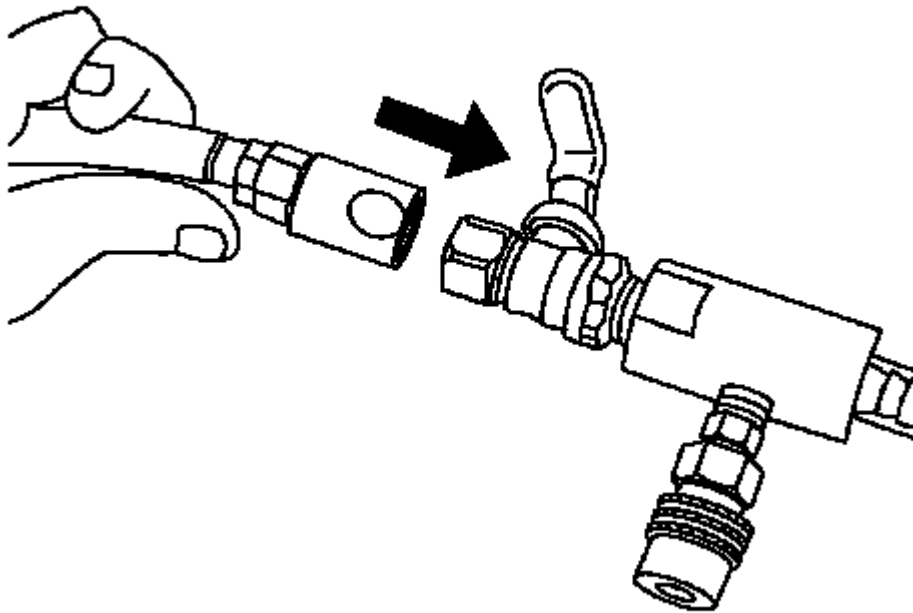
View Of Shop Air Hose & Venturi Assembly
